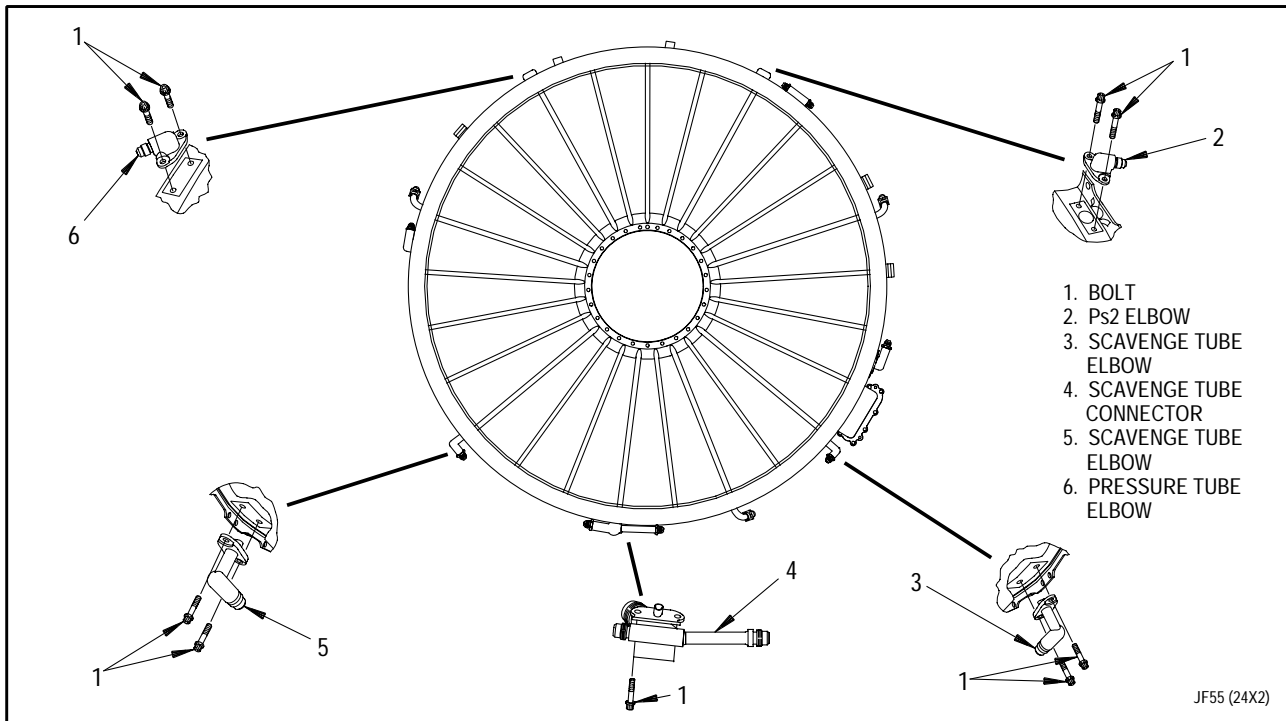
No. 1 Bearing Oil Scavenge Tube Elbows, Pressure Tube Elbow, and Ps2 Elbow - Installation
